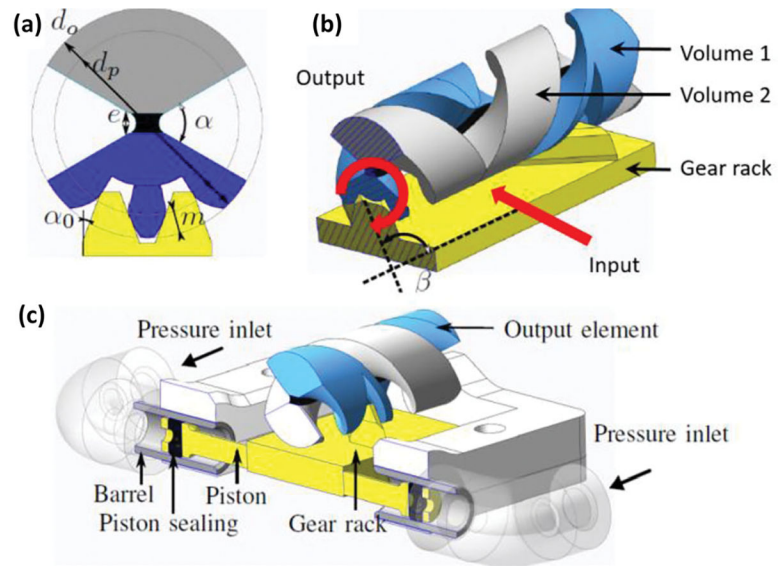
Cross-sectional view (a) and working principle and (b) of the HSC joint with embedded rack-and-pinion system. Assembly of hydraulically-actuated revolute joint (c).⁶⁶
